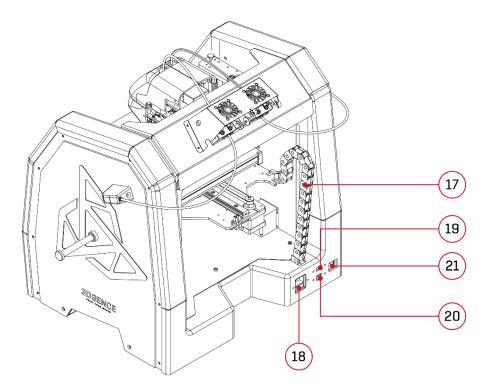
3DGence DOUBLE P255 printer - rear isometric projection:
